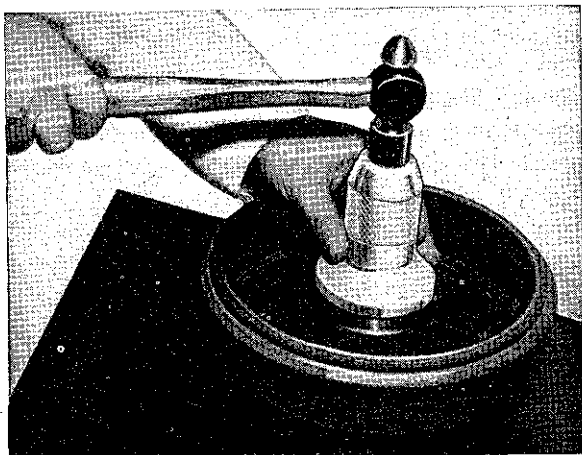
WHEEL HUB OIL SEAL DRIVER
